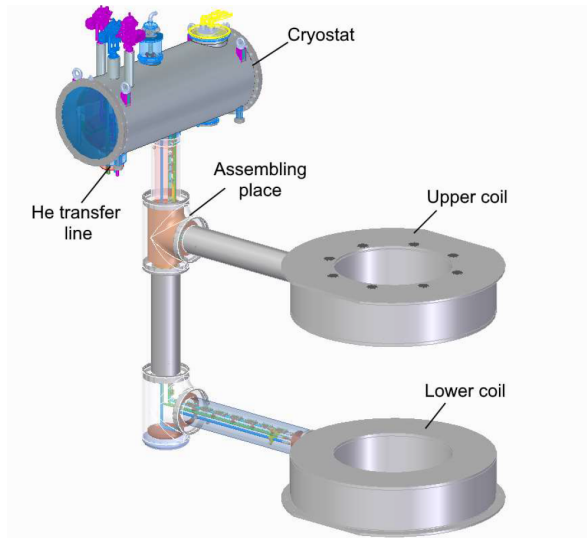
Cryostat and vacuum vessels of the coils and the liquid Helium tubes.
